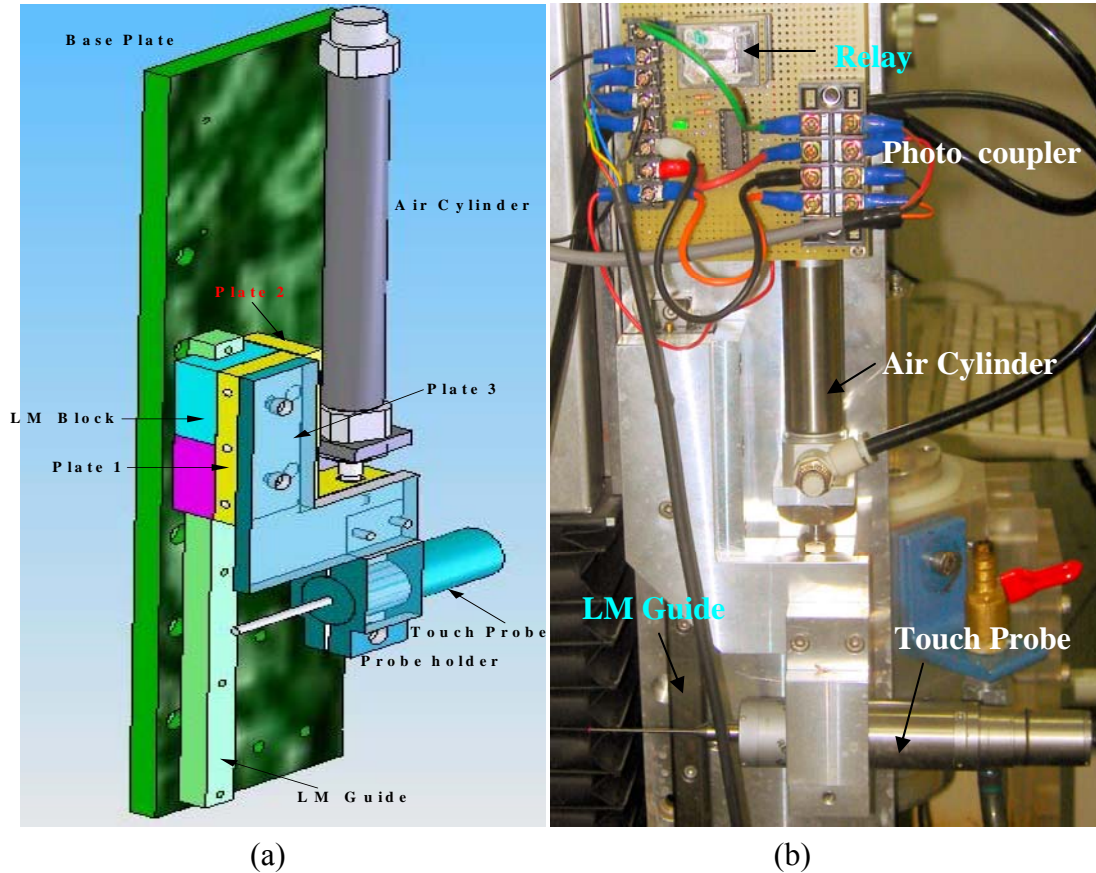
(a) CAD Drawing and (b) Photograph of the on-machine profile measurement system
